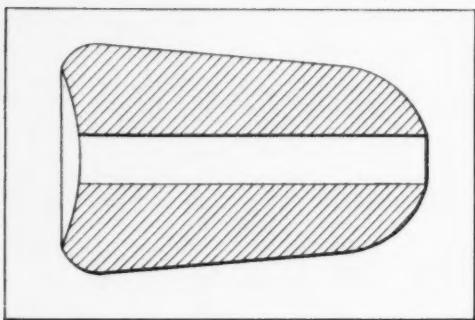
This Simple Form of Nozzle is to be Preferred to More Elaborate Types
